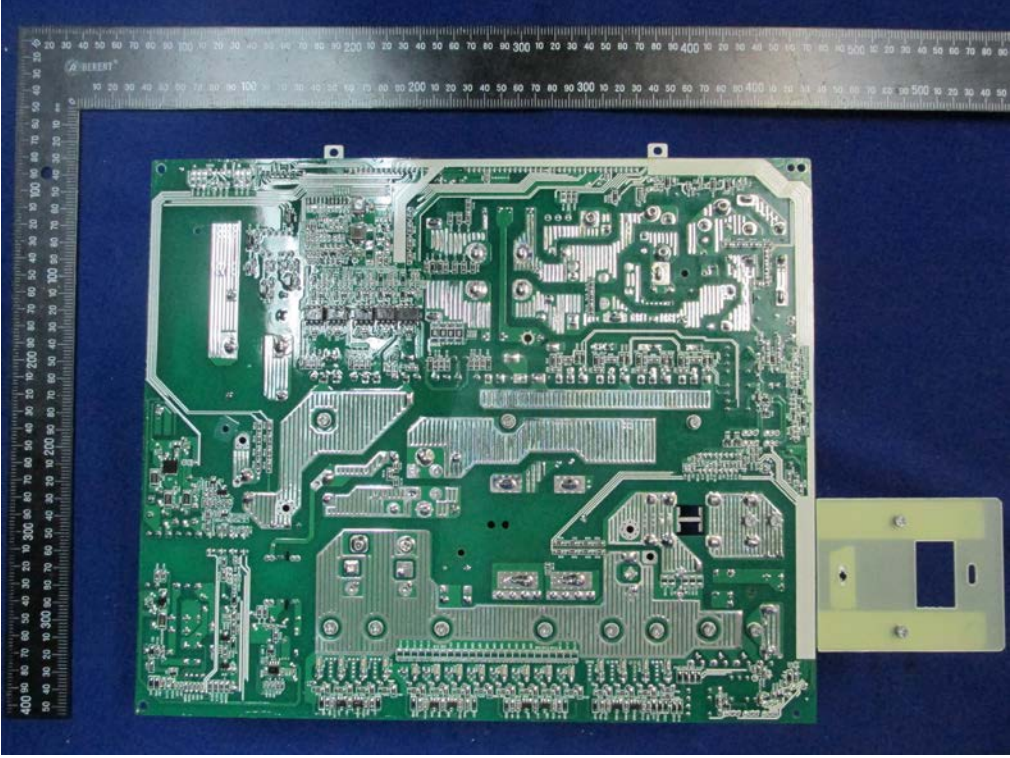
FlinInfini Lite 5kW-48V PCB of main board trace view
